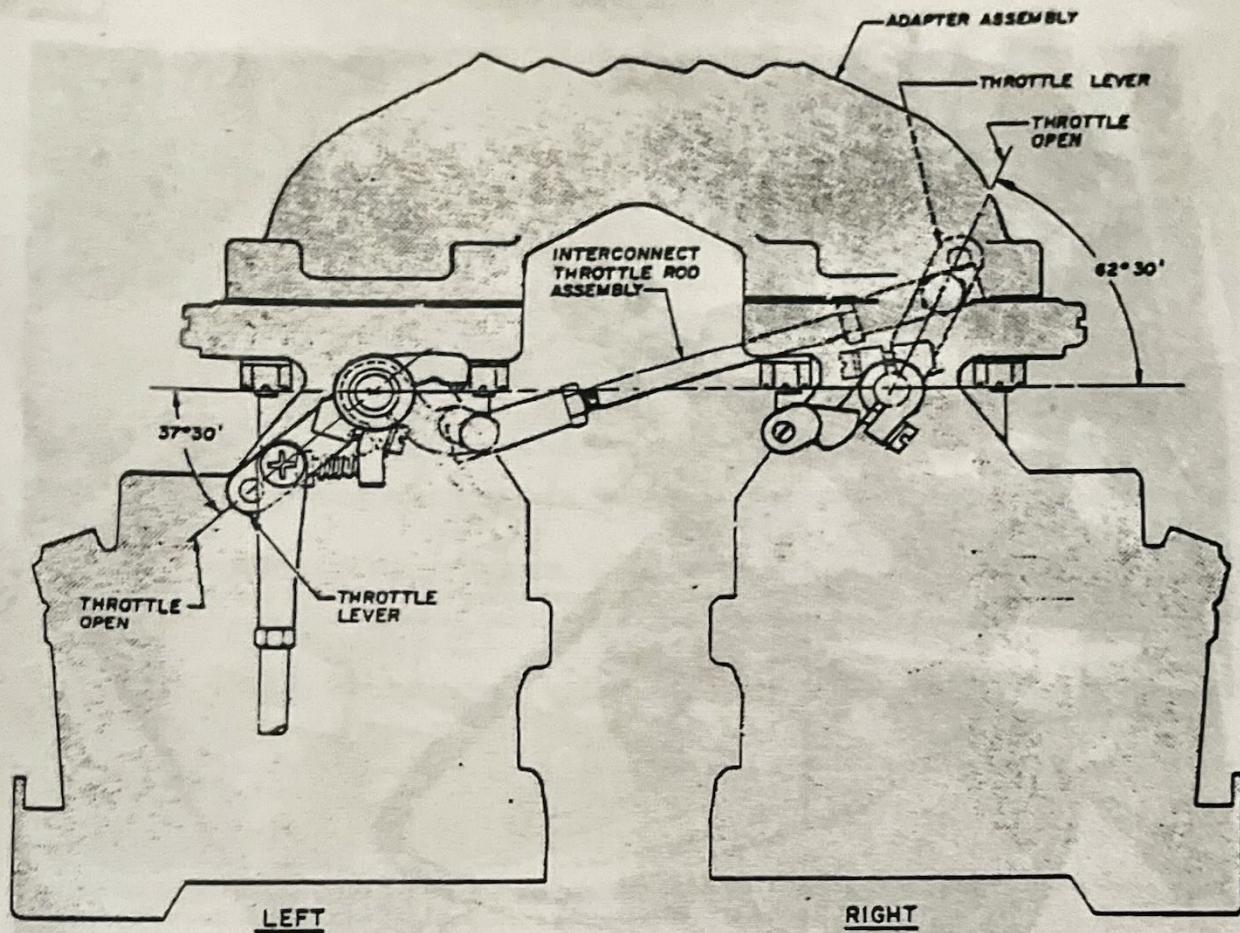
Left-Hand View of Dual Carburetor Installation
